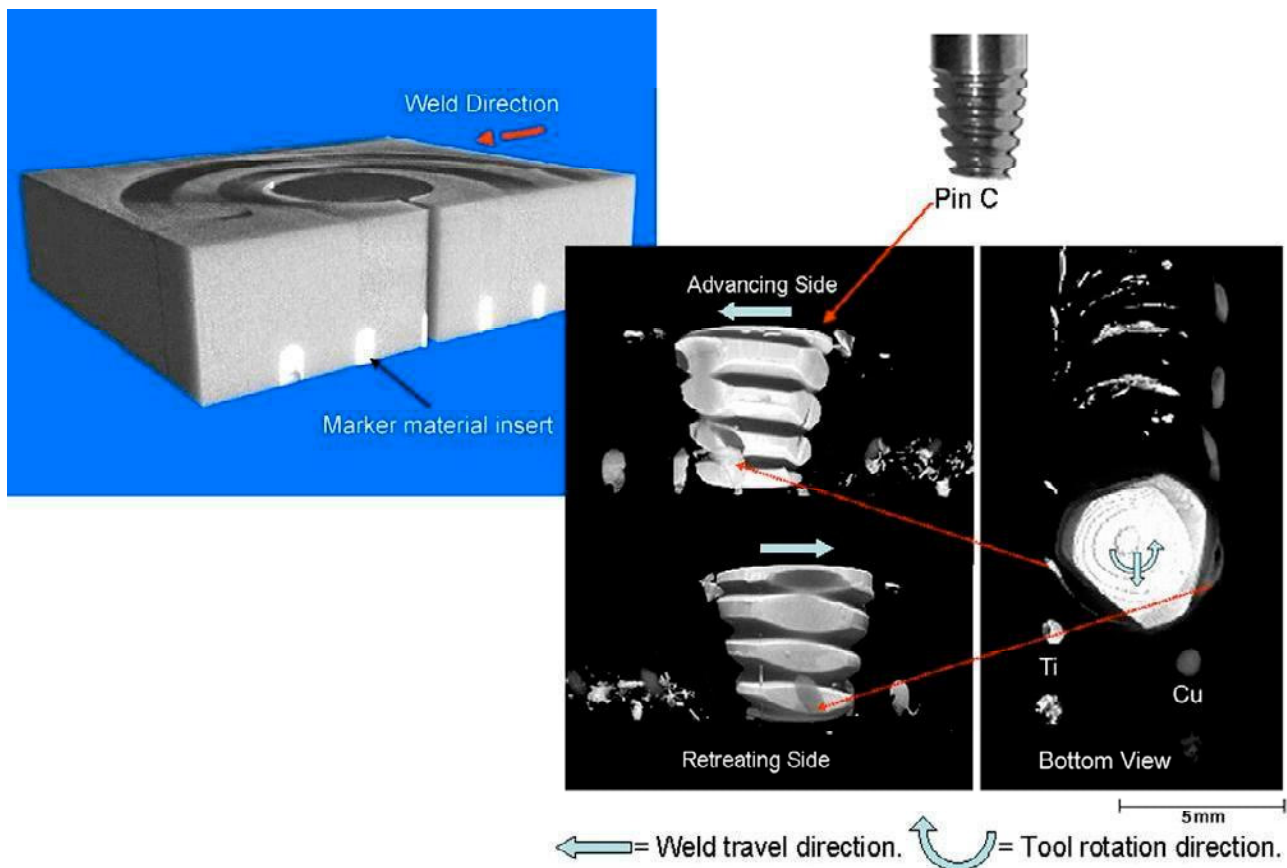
Simultaneous marker material displacement (Cu and Ti) around the frozen in workpiece FSW tool (Pin C – conical and threaded with three equally spaced flats along entire thread length). On the left a volume rendering showing the Aluminium sample (5 mm thickness) and the introduced marker material. On the right the Aluminium is set transparent to reveal the 3D distribution of the marker material around the pin. The tomographical scans were performed at beamline W2 using a photon energy of about 64 keV.
